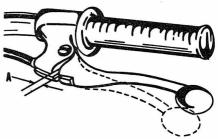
The clutch hand lever should have 0.12 inch free play at (A).
